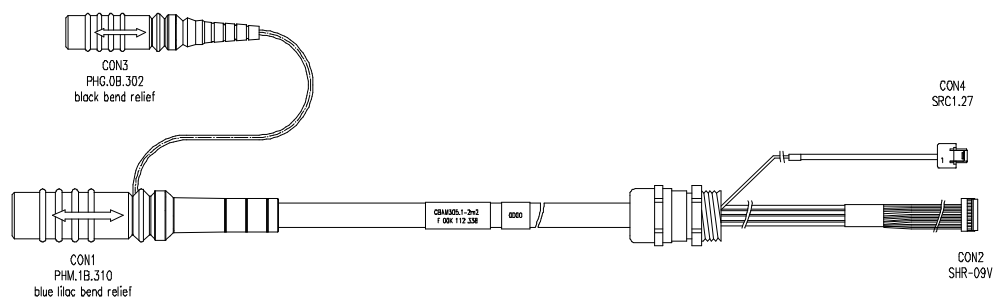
CBAM305.1-2m2 Cable - Dimensions
